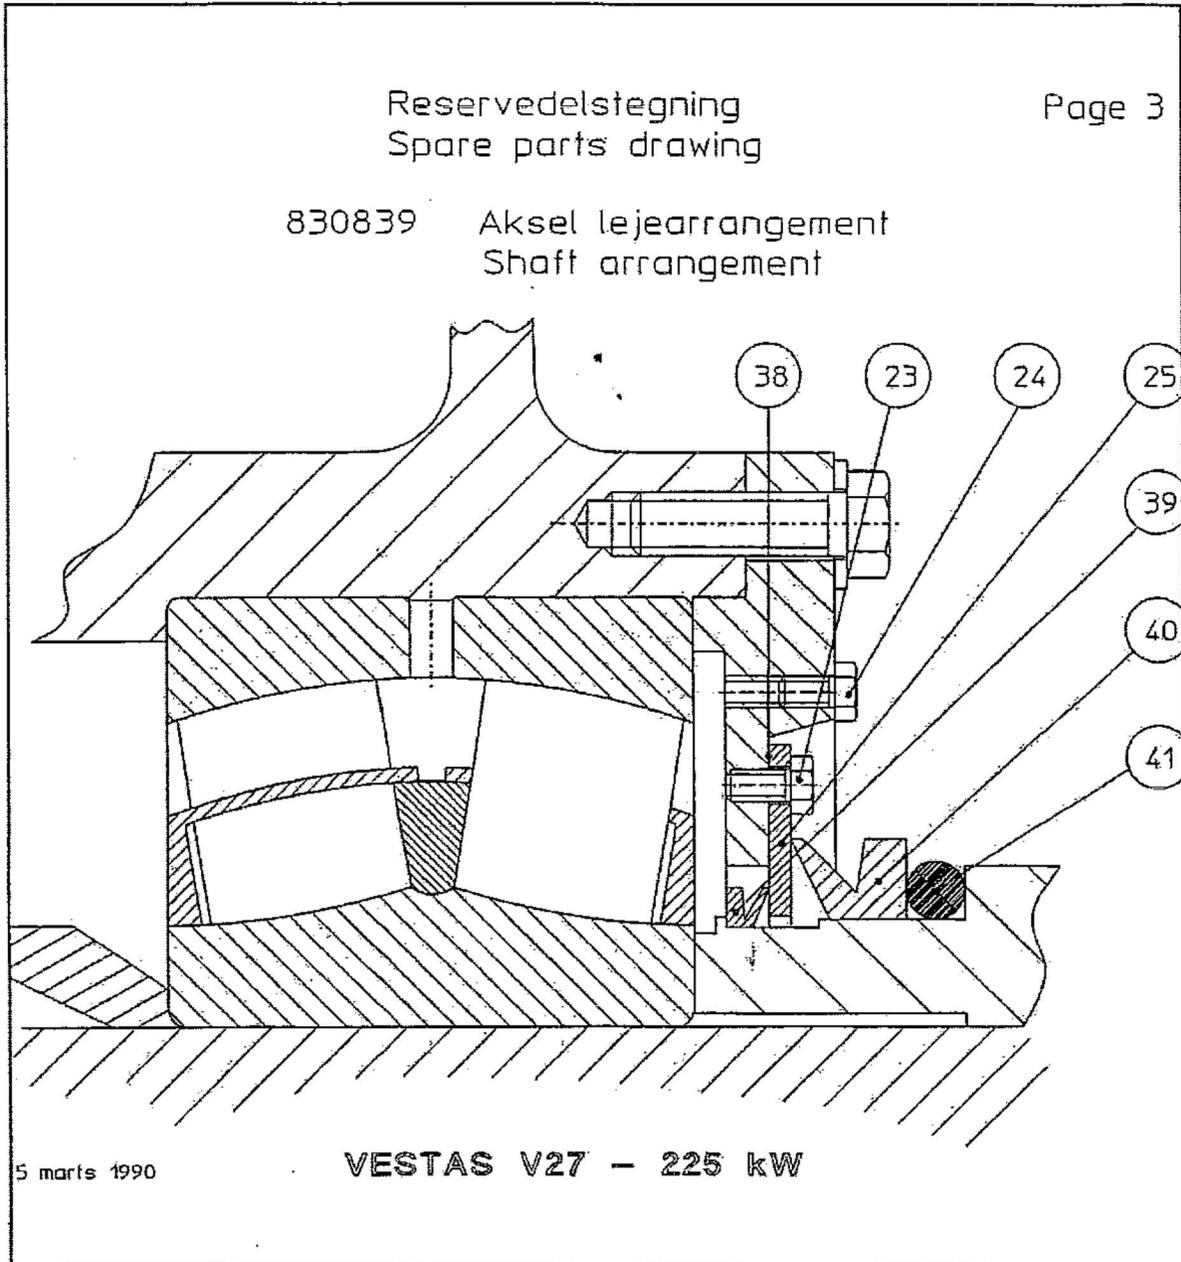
Spare parts drawing, main shaft assembly, V27, rear roller bearing and cover
